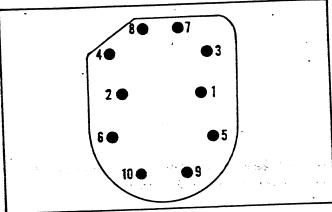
HEAD BOLT TIGHTENING DIAGRAM
